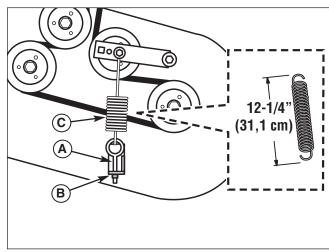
Mower Belt Tensioner Spring Measurement (36" Models)
